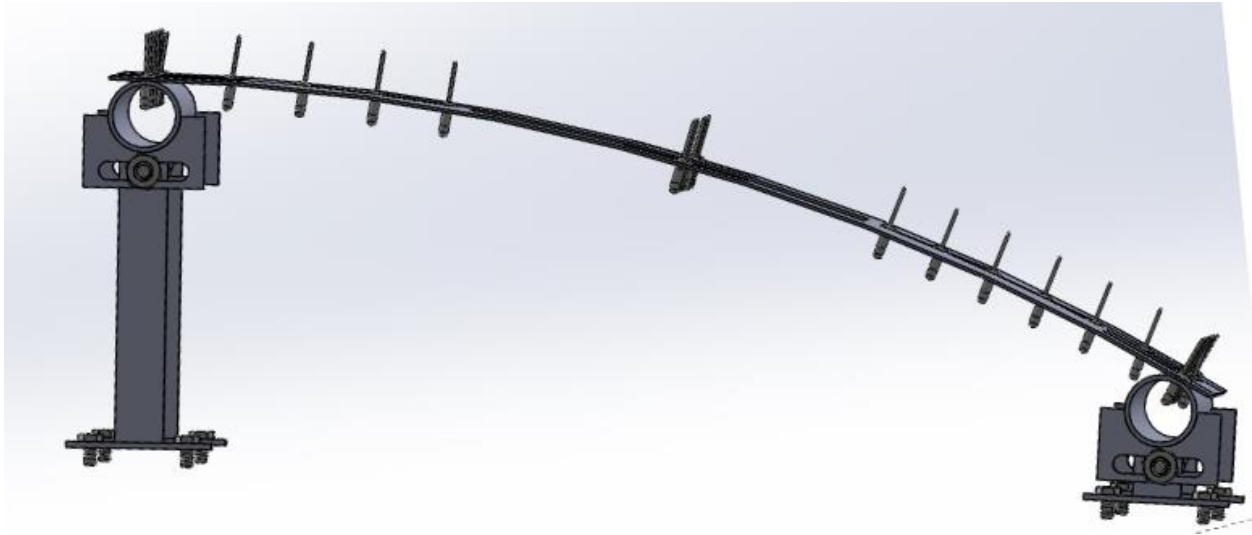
Shows a CAD assembly of the hull and how it attaches to the supports.
